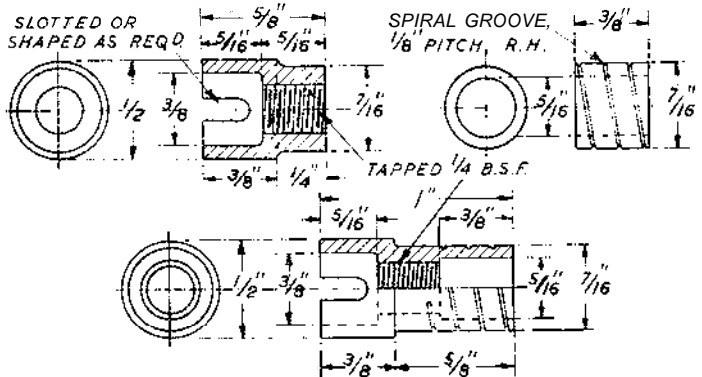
Coupling and oil retainer sleeve, showing (below) an alternative fitting combining both components
